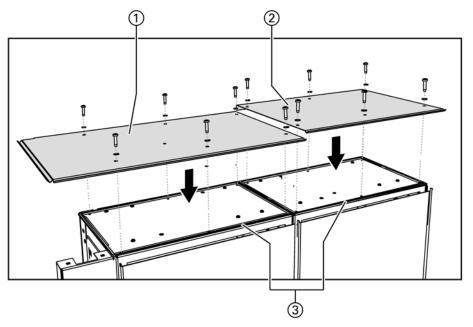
Example: Fastening protection plate for end panel and intermediate panel
